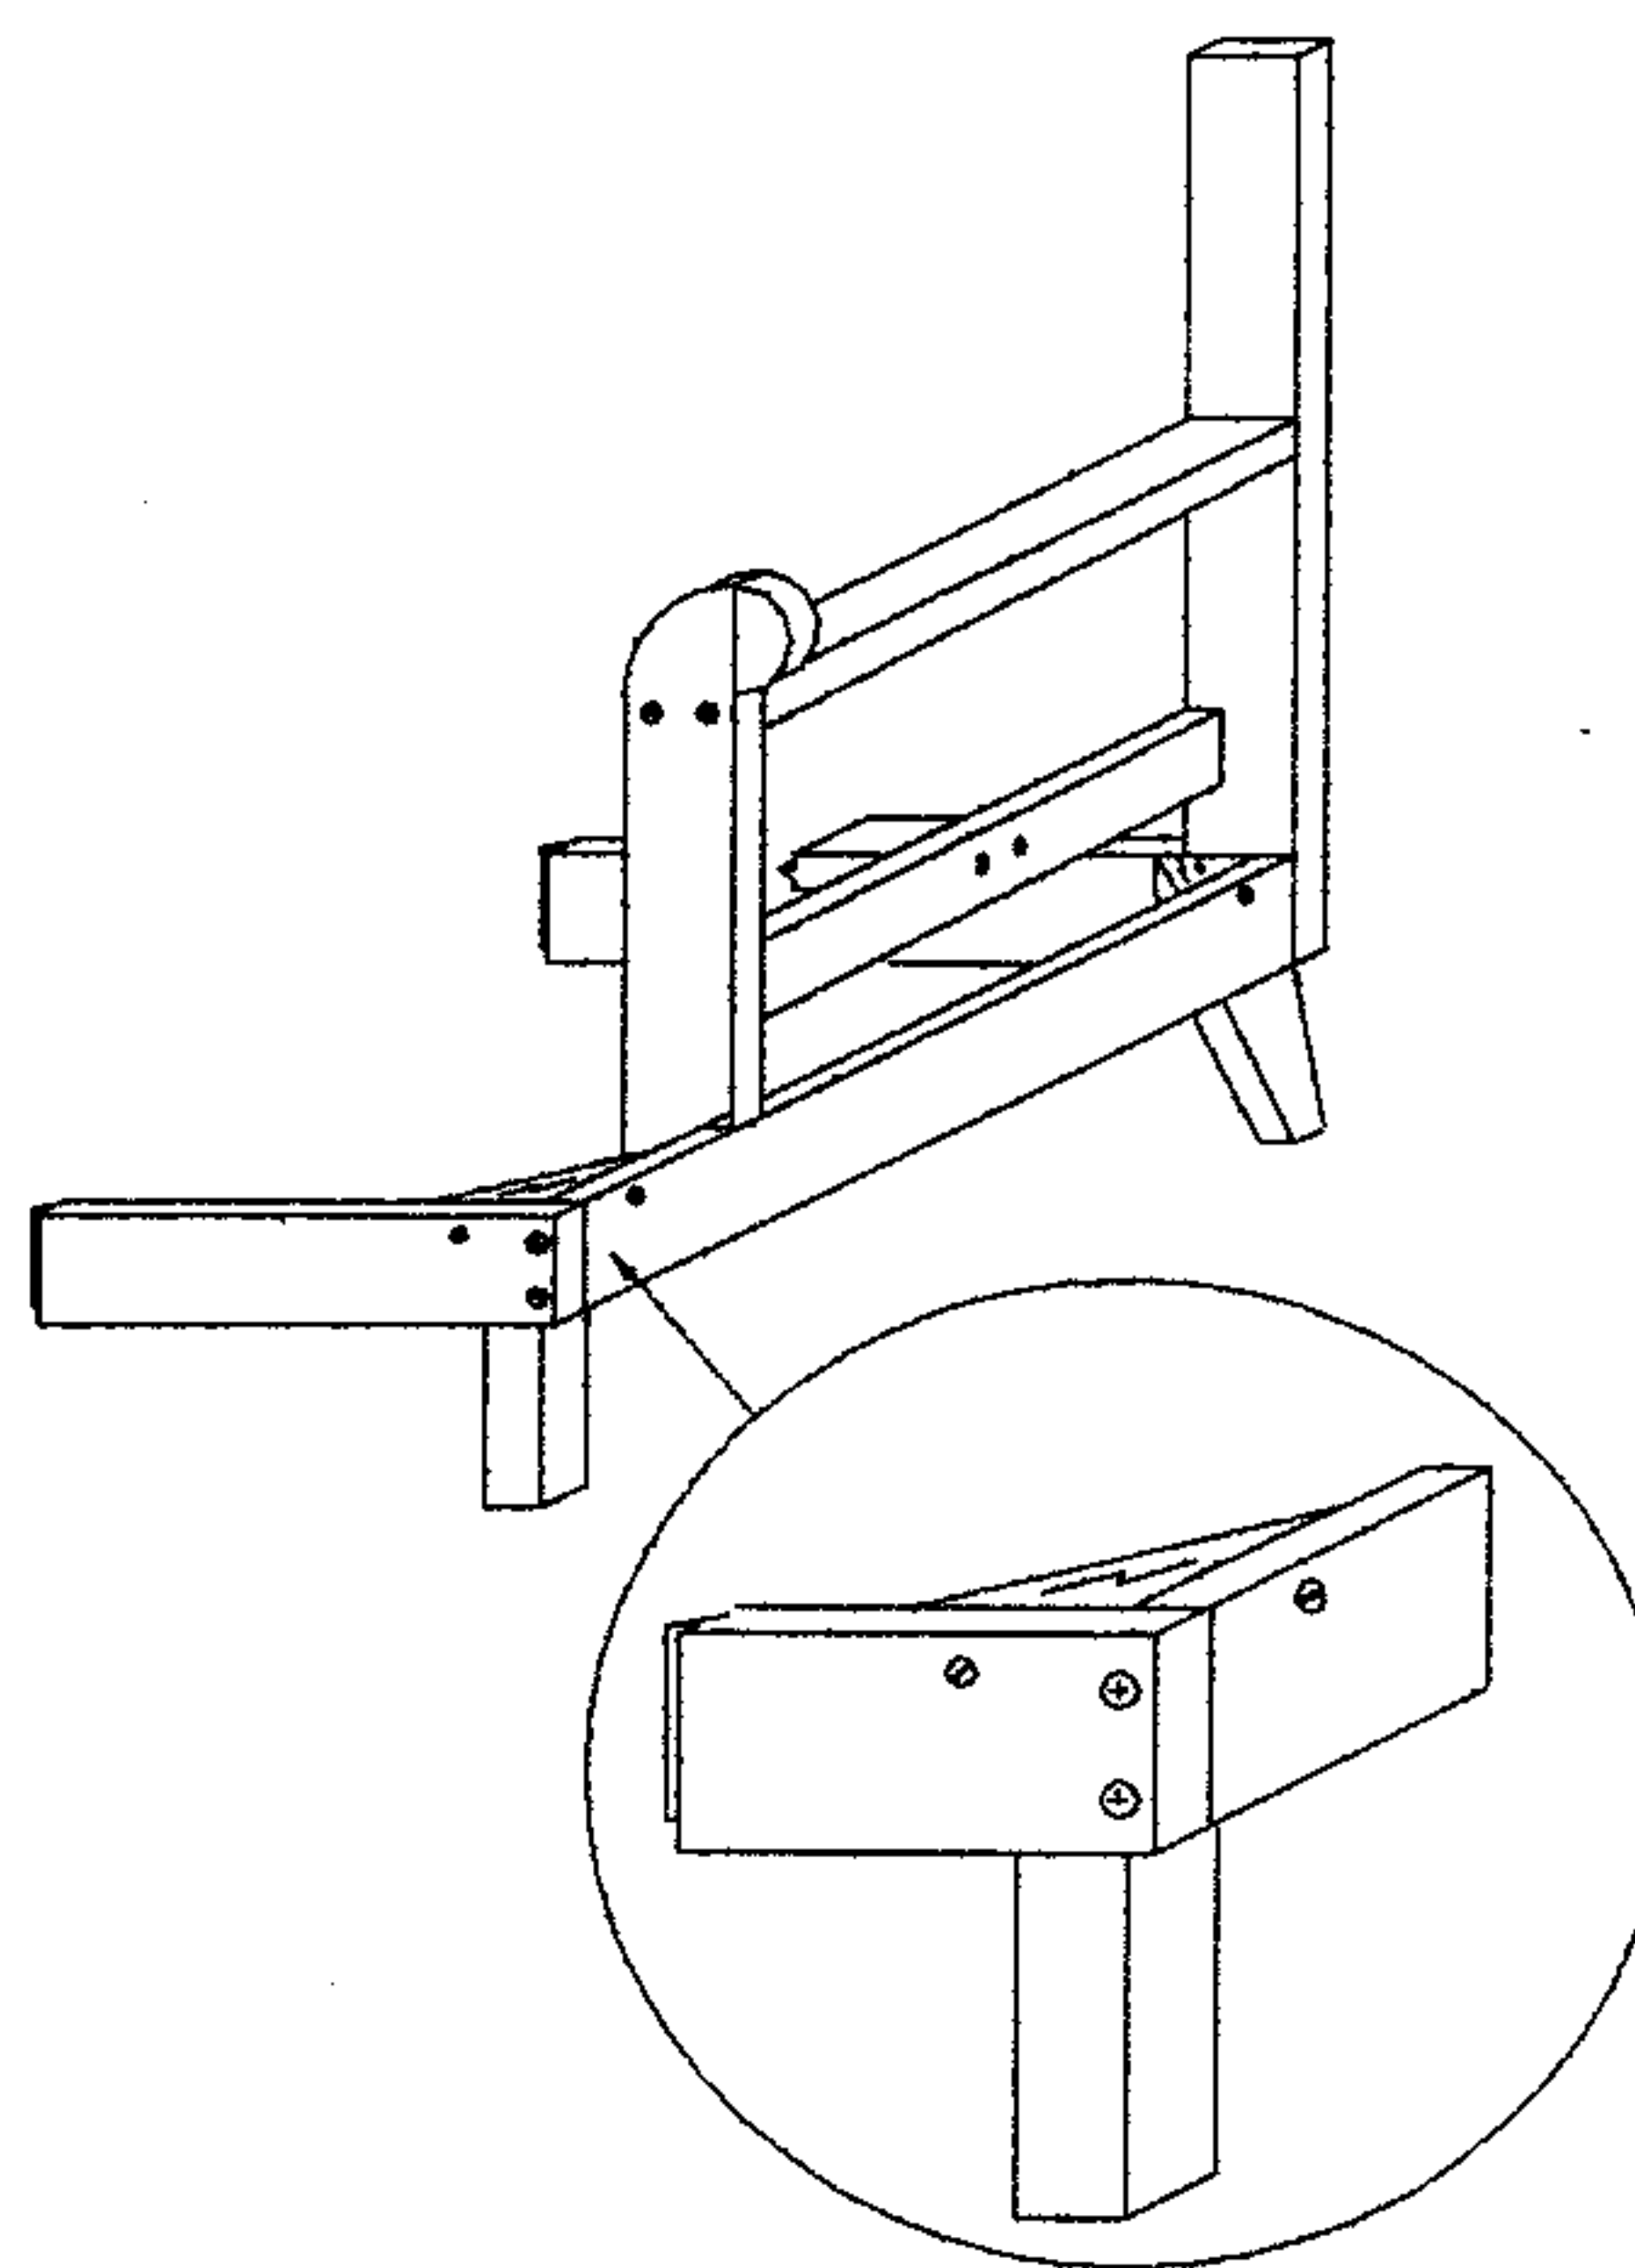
Reinforcement of the side rail to front rail joint with a solid wood corner block.
